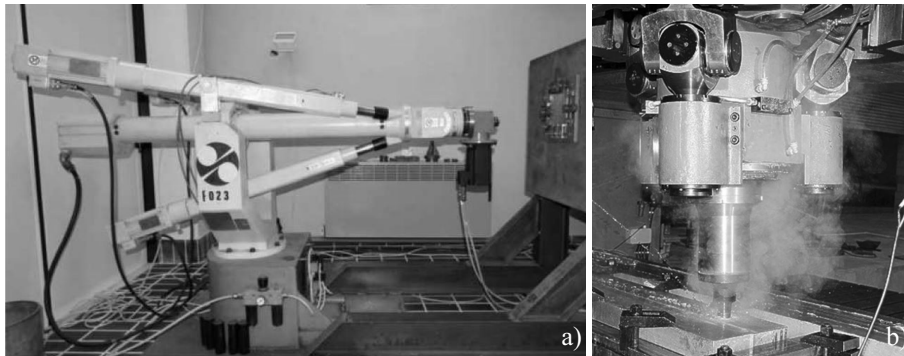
Picture and video of COMAU Tricept HP1 robot used for FSW at UnivPM a) and b) Shi's prototype of the PKM tool head for friction stir welding.
